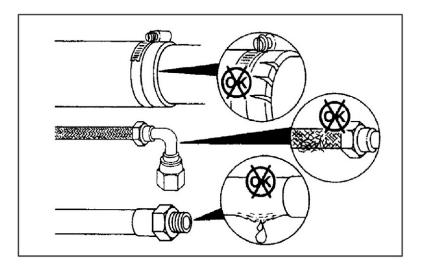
HOSES AND FUEL LINE INSPECTION
